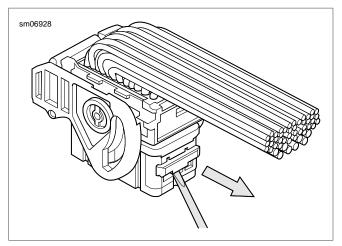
Molex CMC Sealed Connector Secondary Lock
